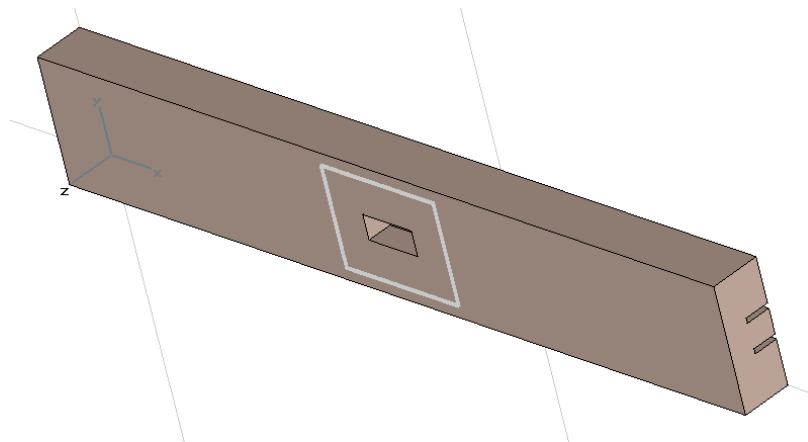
Design of the metal piece connected between adapter and plates, view from the adapter's side
